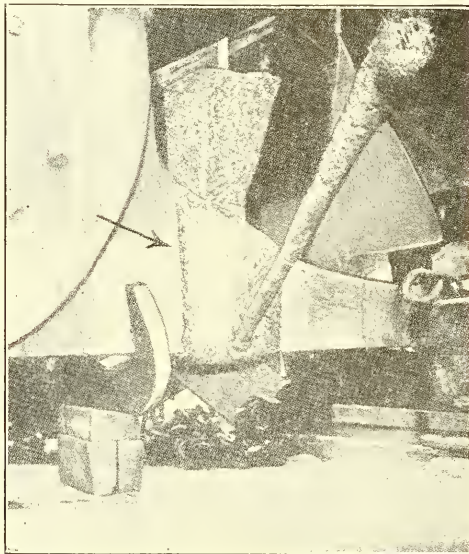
Sternpost Weld on the 'William Henry Mack,' July, 1912.
